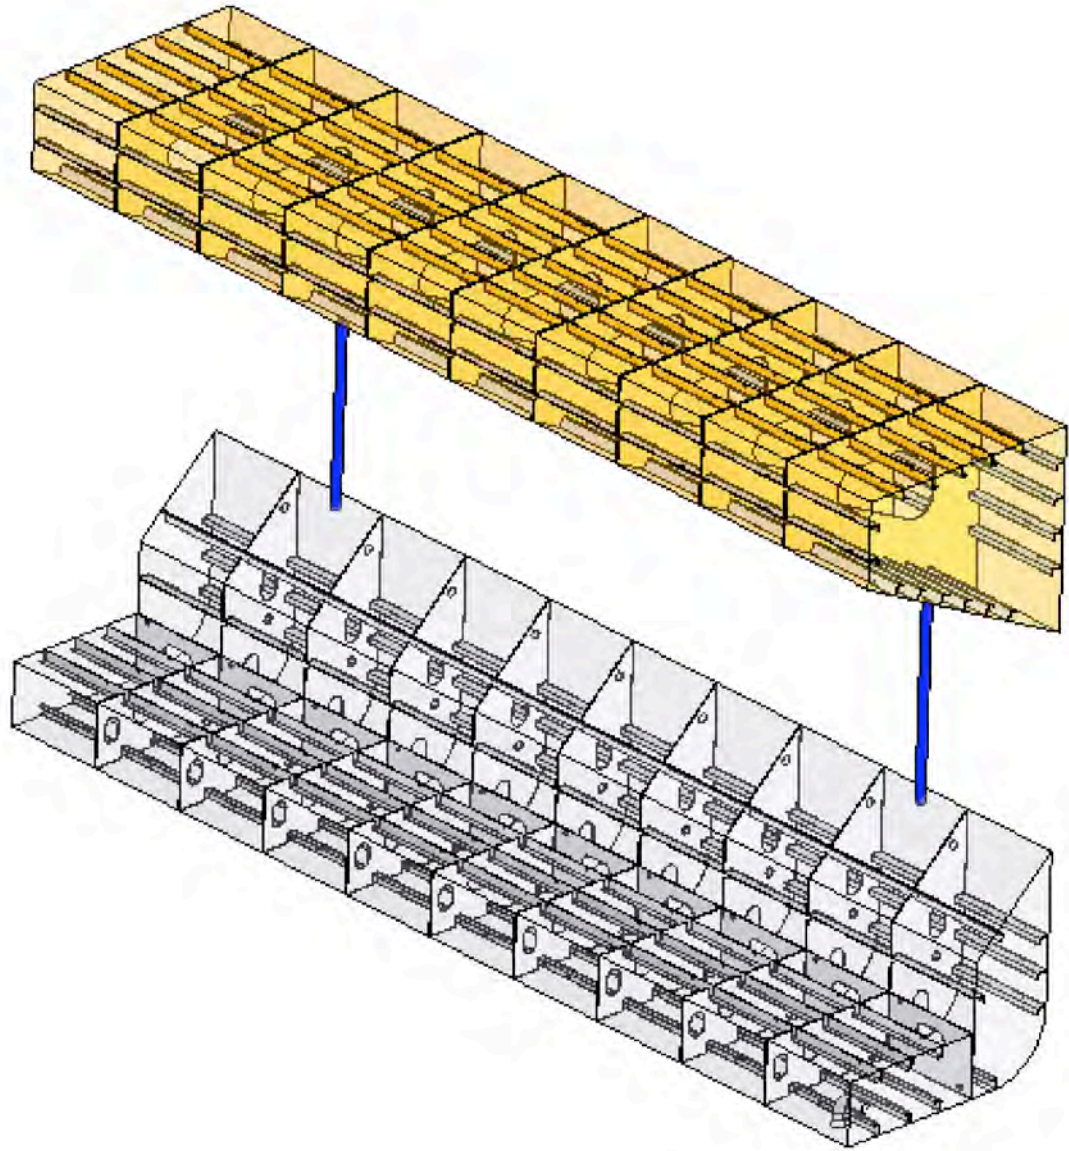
Drawing of bulk carrier tank. Three tanks are shown: lower left: double bottom tank (DBT); lower right: hopper tank (HT) and upper: topside tank (TT).
